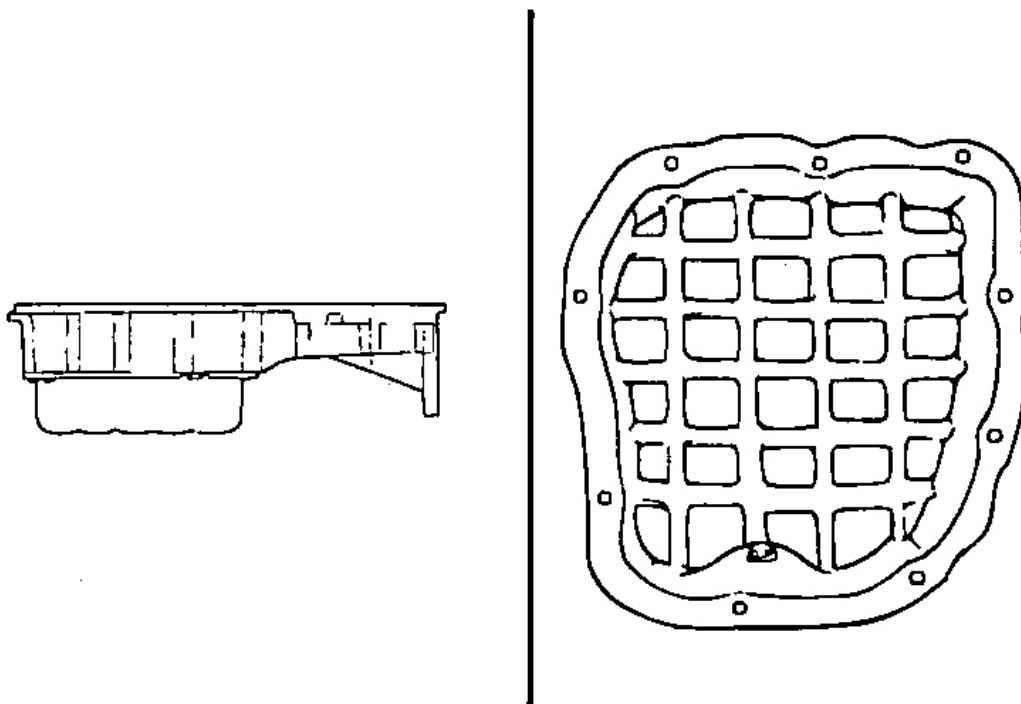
Installing Oil Pan Bolts (1 Of 2)
